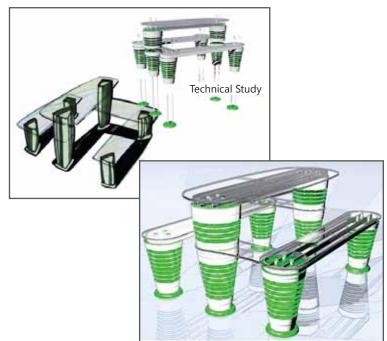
Concept No.4 was selected for prototype fabrication. The figure shows the exploded view and assembly.
